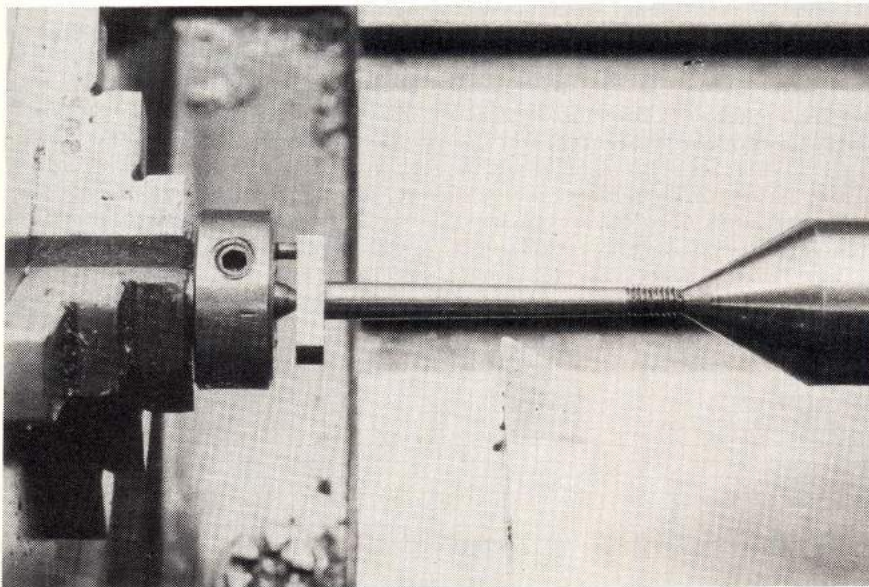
The special centre-cum-carrier shown set up for machining the eccentric rods.
